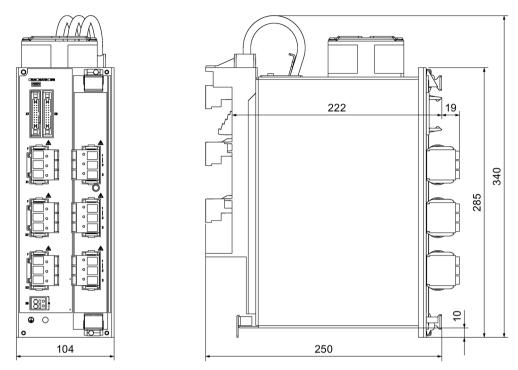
Dimension drawing of POM4320 for busbar mounting
